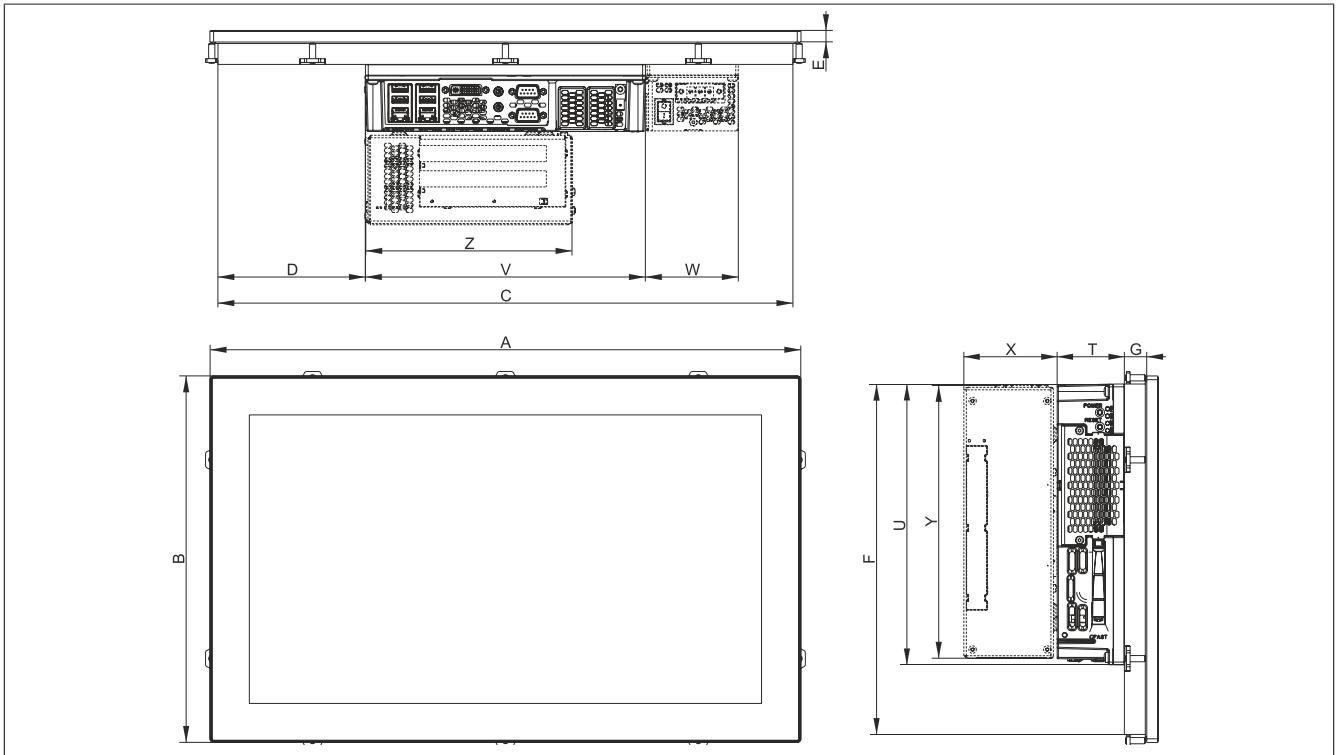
Panel PC 900 with AP9x3 display units - Dimensions
